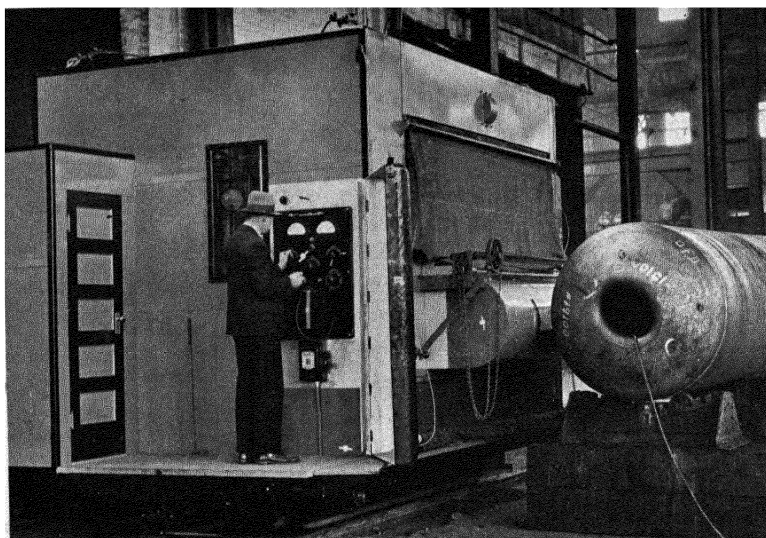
Exterior view of modern industrial x-ray installation for radiographic examination of welded pressure vessels. (*Courtesy Henry Vogt Machine Company, Louisville, Ky.*)
